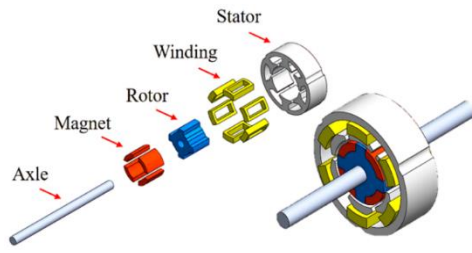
Exploded view and assembly drawing of the inset permanent magnet synchronous motor. The motor consists of a stator with six yokes, a 60 windings coil winding, a rotor containing four permanent magnet poles, and an axle (image courtesy (Pang et al., 2020))
